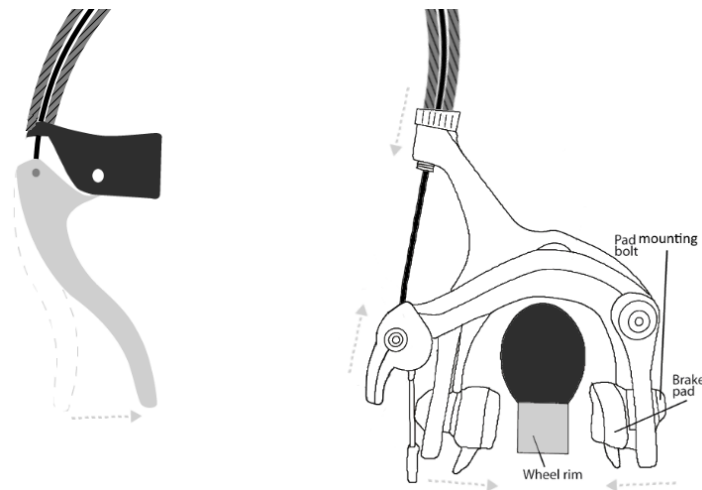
Schematic drawing of a rim brake system. With the brake lever on the left and the brake caliper on the right.
